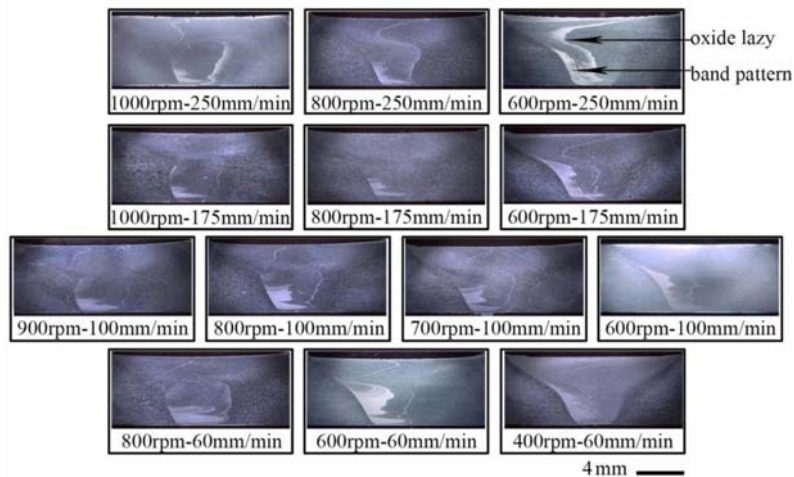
Macrographs of transverse section for FSW joints obtained at various welding parameters.
